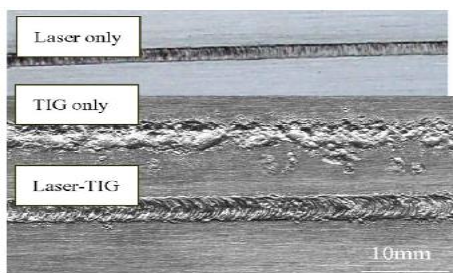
Comparison of weld surface for three welding methods: $P_{laser}=400$ W; $I_{arc}=70$ A; and $v=1100$ mm/ min (Liming et al. 2004)
